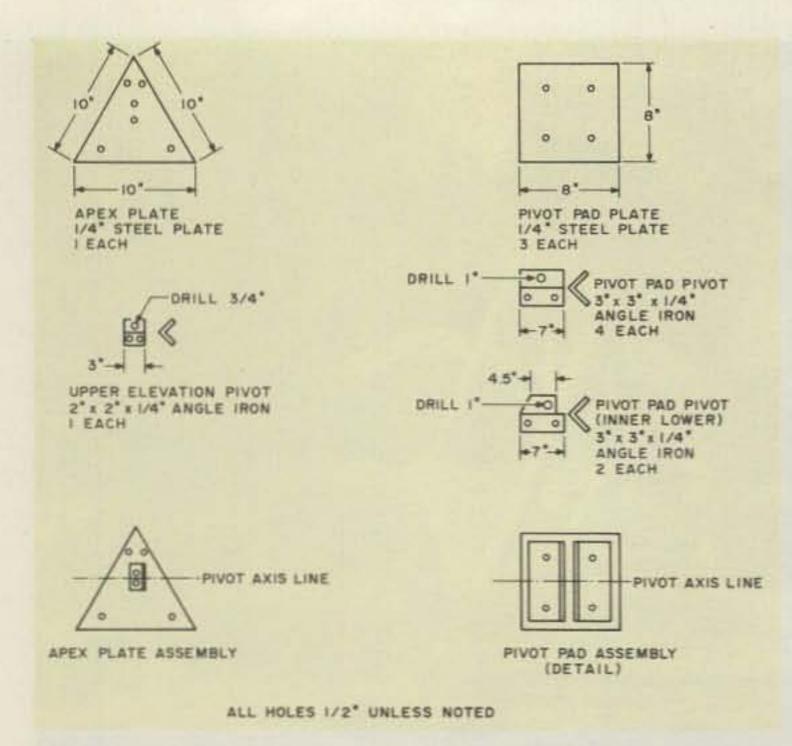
Apex plate and pivot pad cutting and assembly detail.
